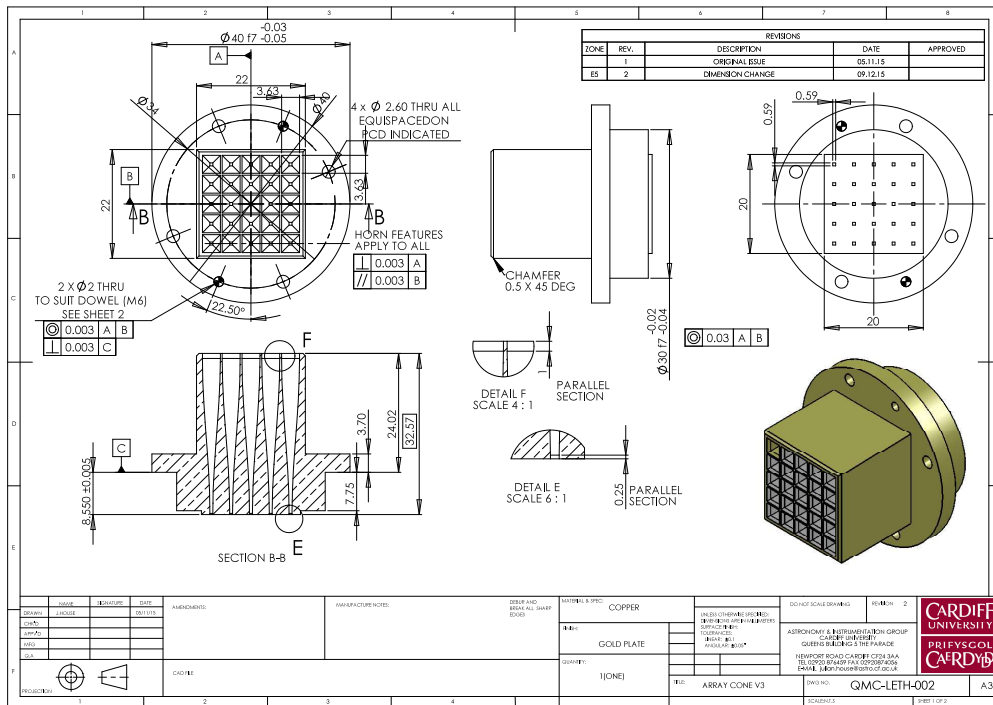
Detector feed horn array. Drawing provided by QMC Instruments.
